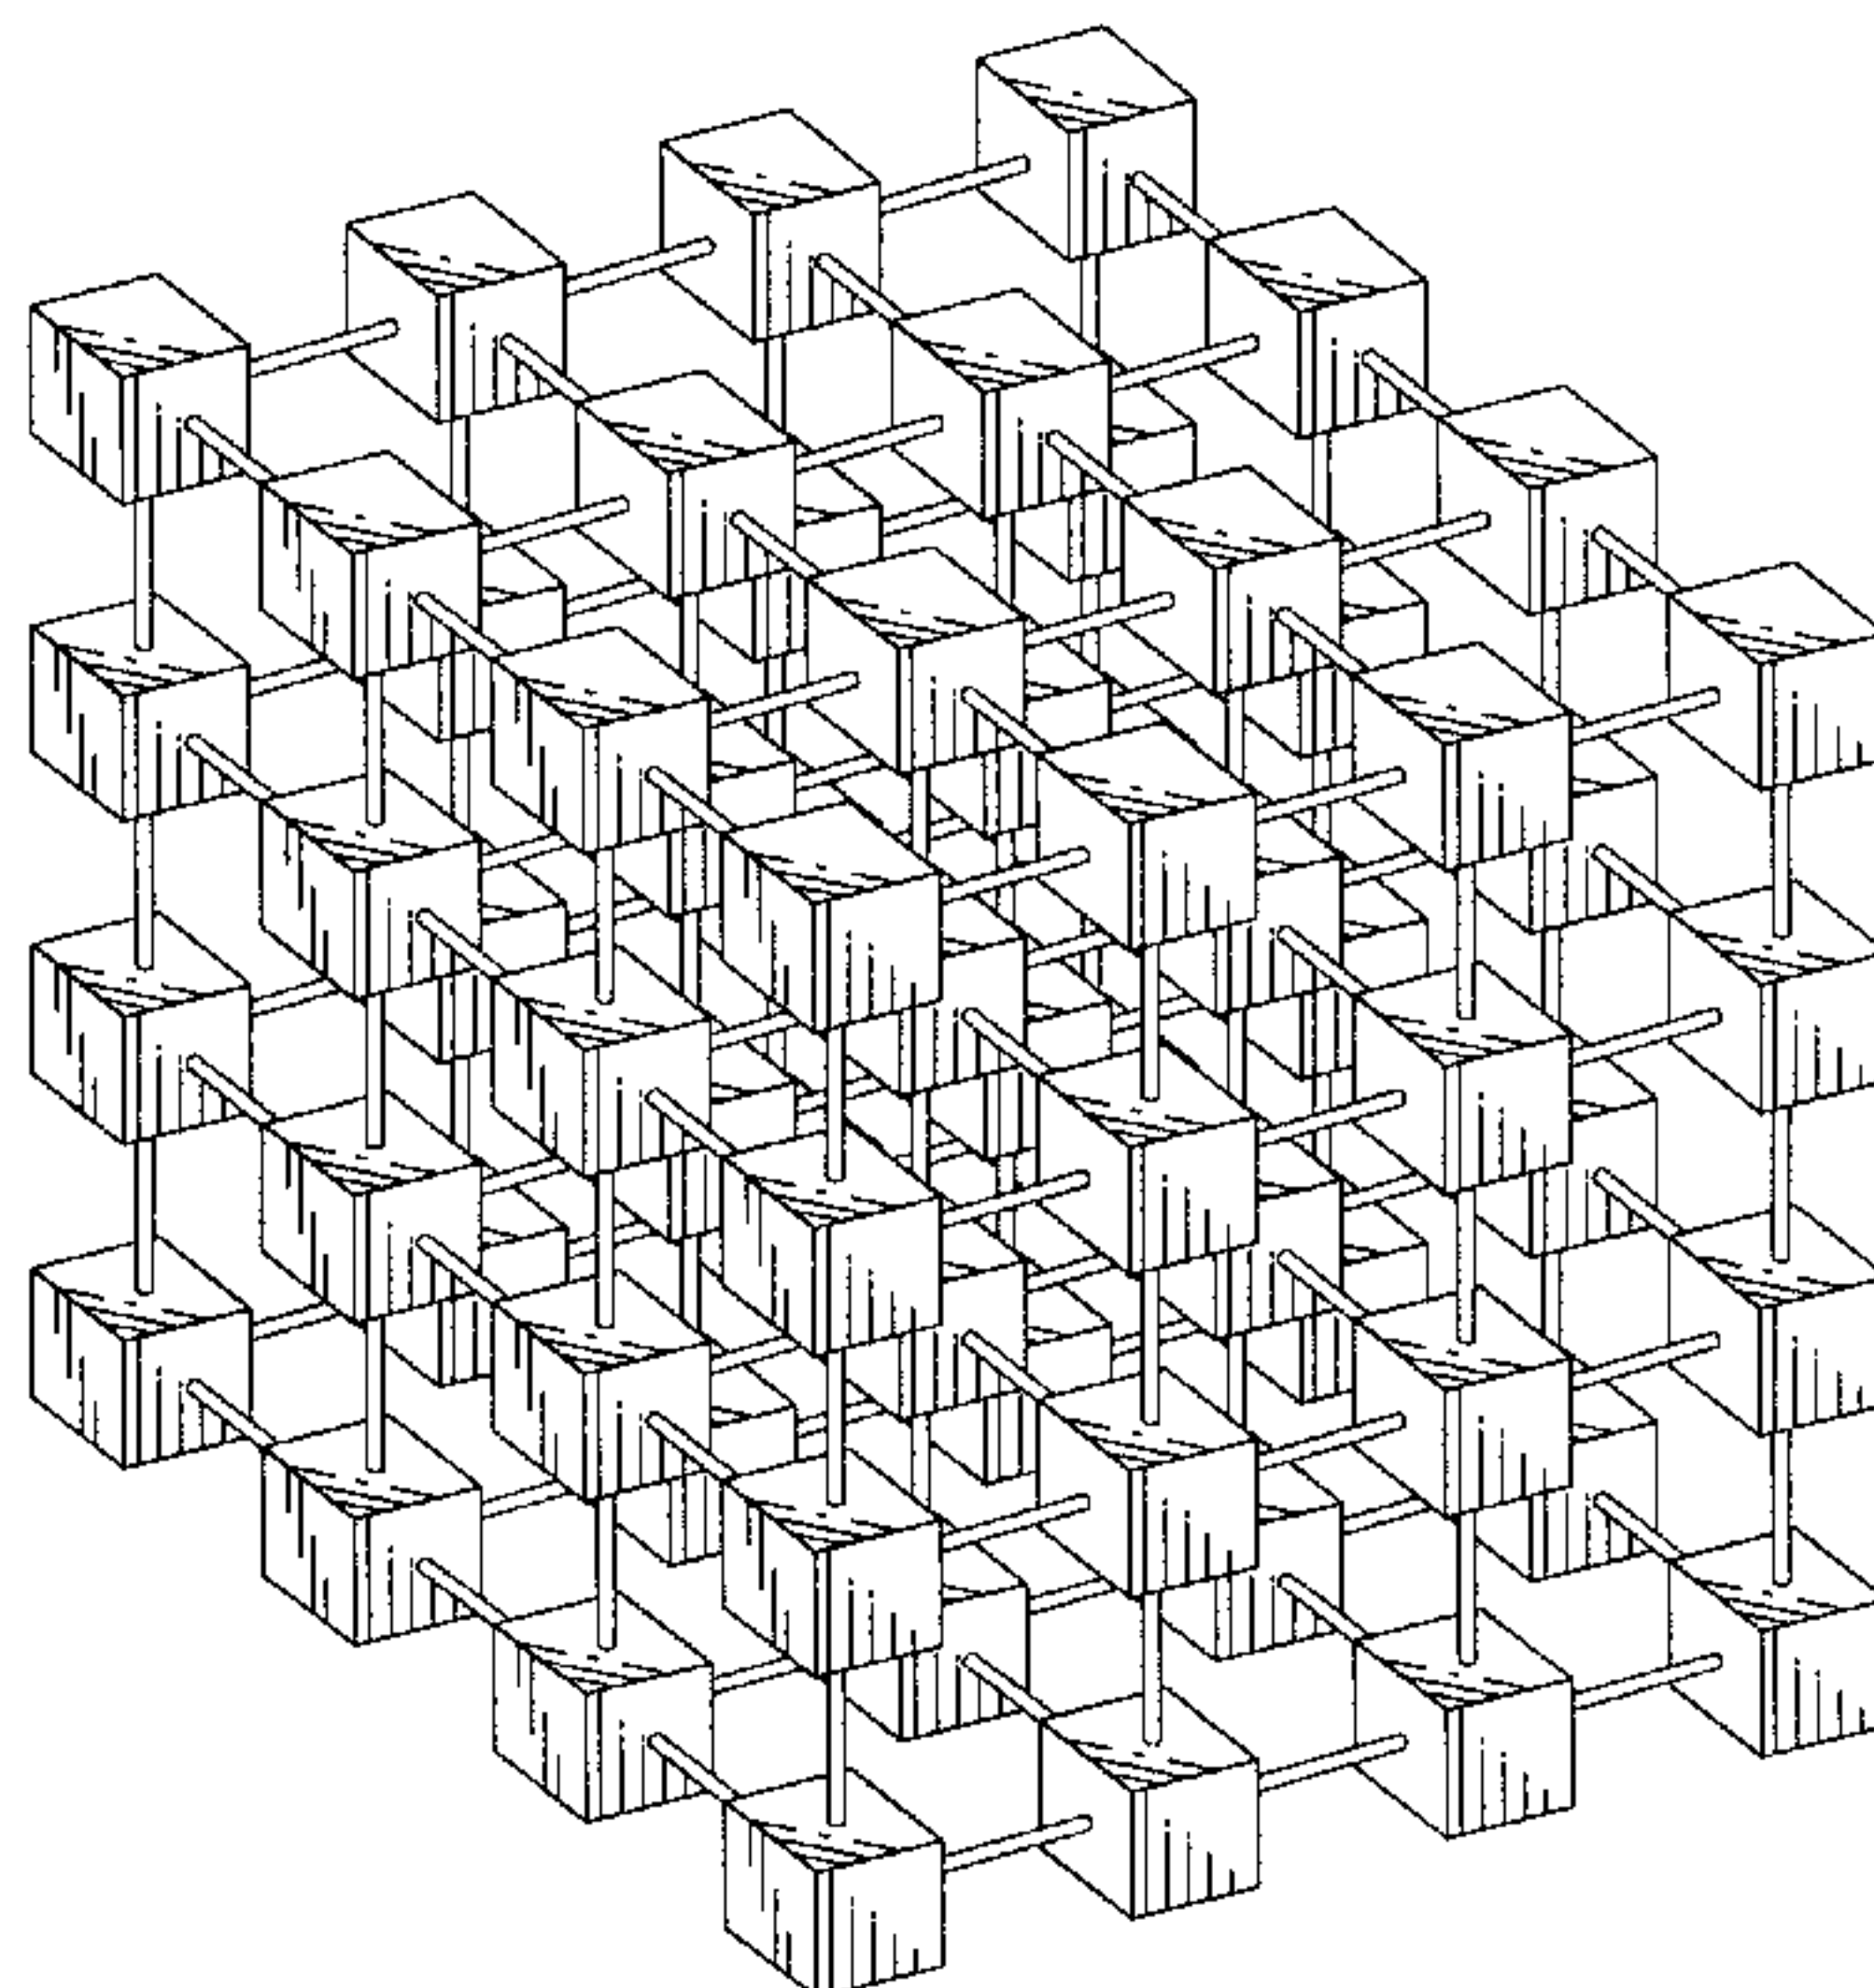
is an isometric view of a sixth embodiment of the invention.
